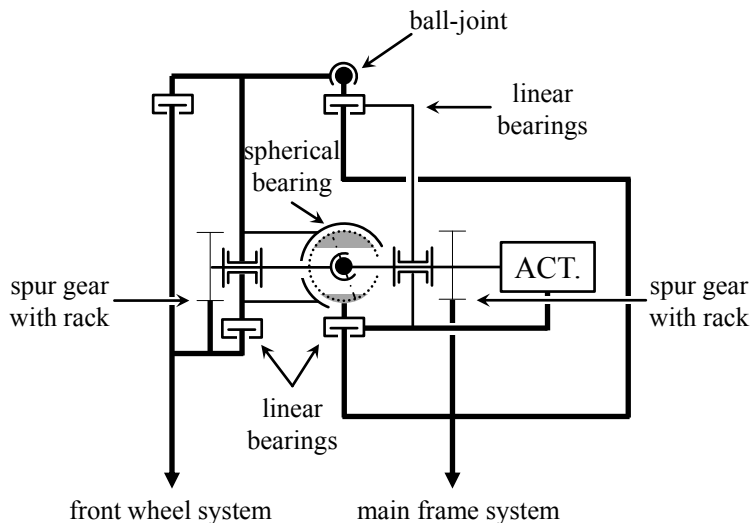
Parallel BSTAM with floating drive shaft and actuator, derived from Figure 4.4 for the use in a steering head or attachment to the double wishbones of a hub-center steering (KC 3, AC 2). In this case, also conventional steering bearings can be used instead of the ball joints<sup>192</sup>.
